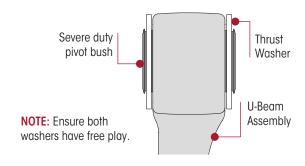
Severe-duty Pivot Bush Thrust Washer Check
